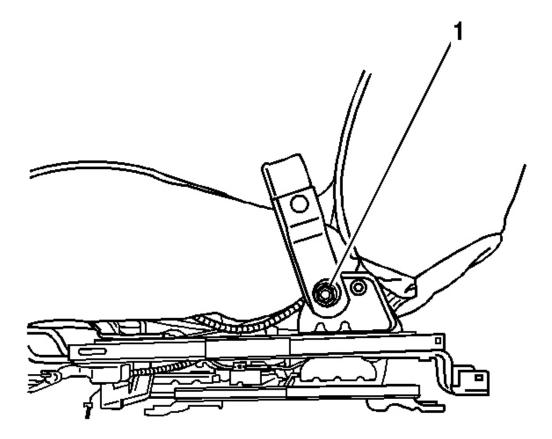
Seat Belt Buckle Nut Courtesy of GENERAL MOTORS CORP.
